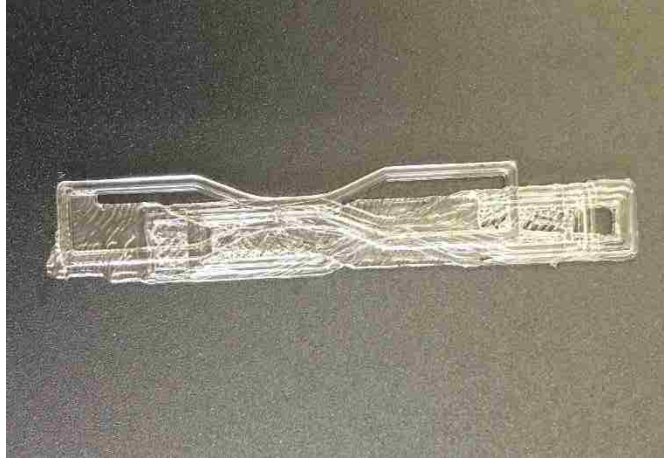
An attempt to 3D print a dog bone without proper calibration to the machine.
